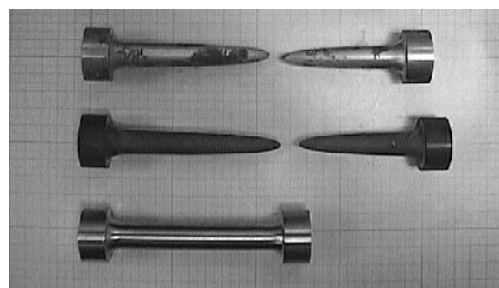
Fractured uniaxial creep specimen of OLHF-material
